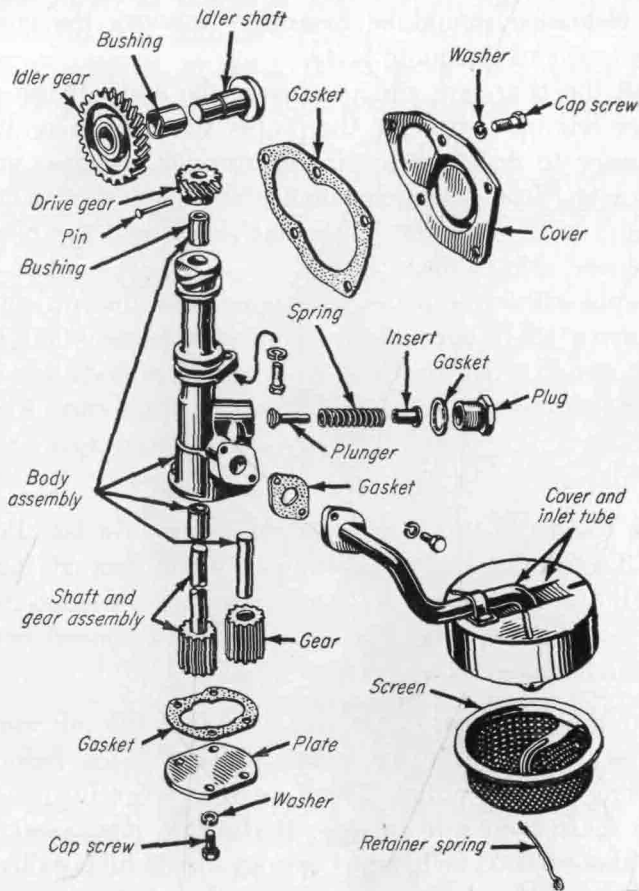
Disassembled view of oil pump used on V-8 engine. (Ford Motor Company)
